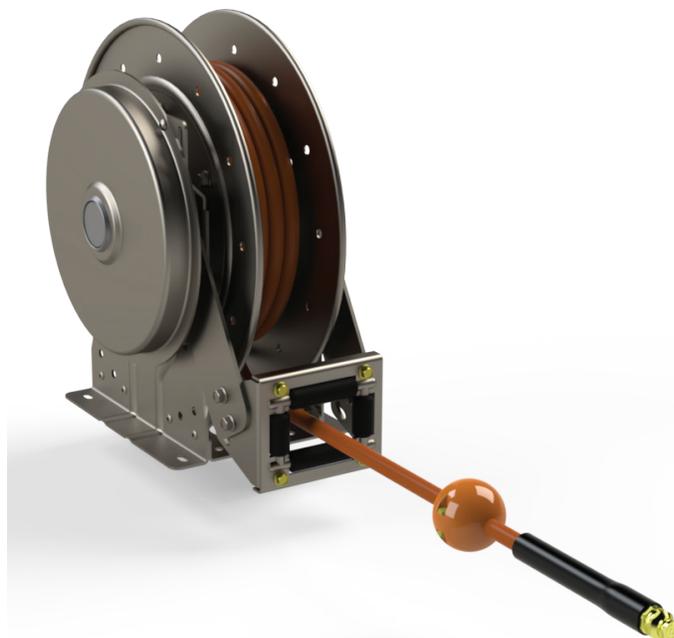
Reel with Hose & Ball Stop Ready for Inlet Connection
